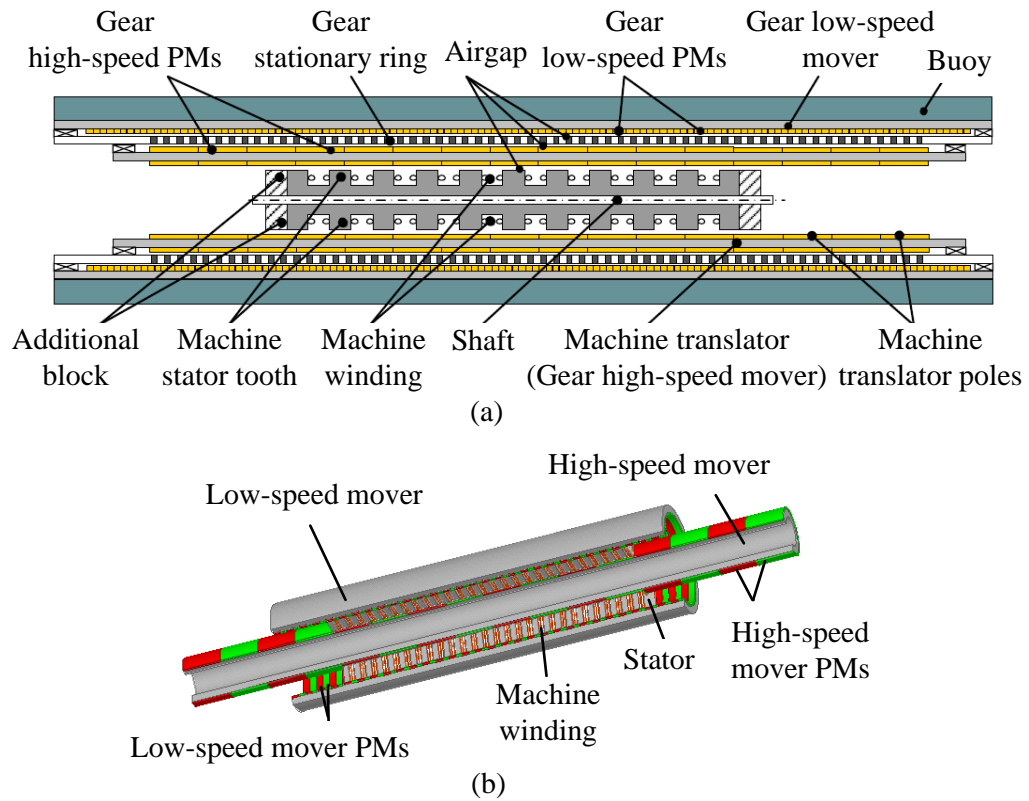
Configurations of linear magnetic-geared machines. (a) TLMG integrated PM machine[70]. (b) SS-TLMG machine[71].
